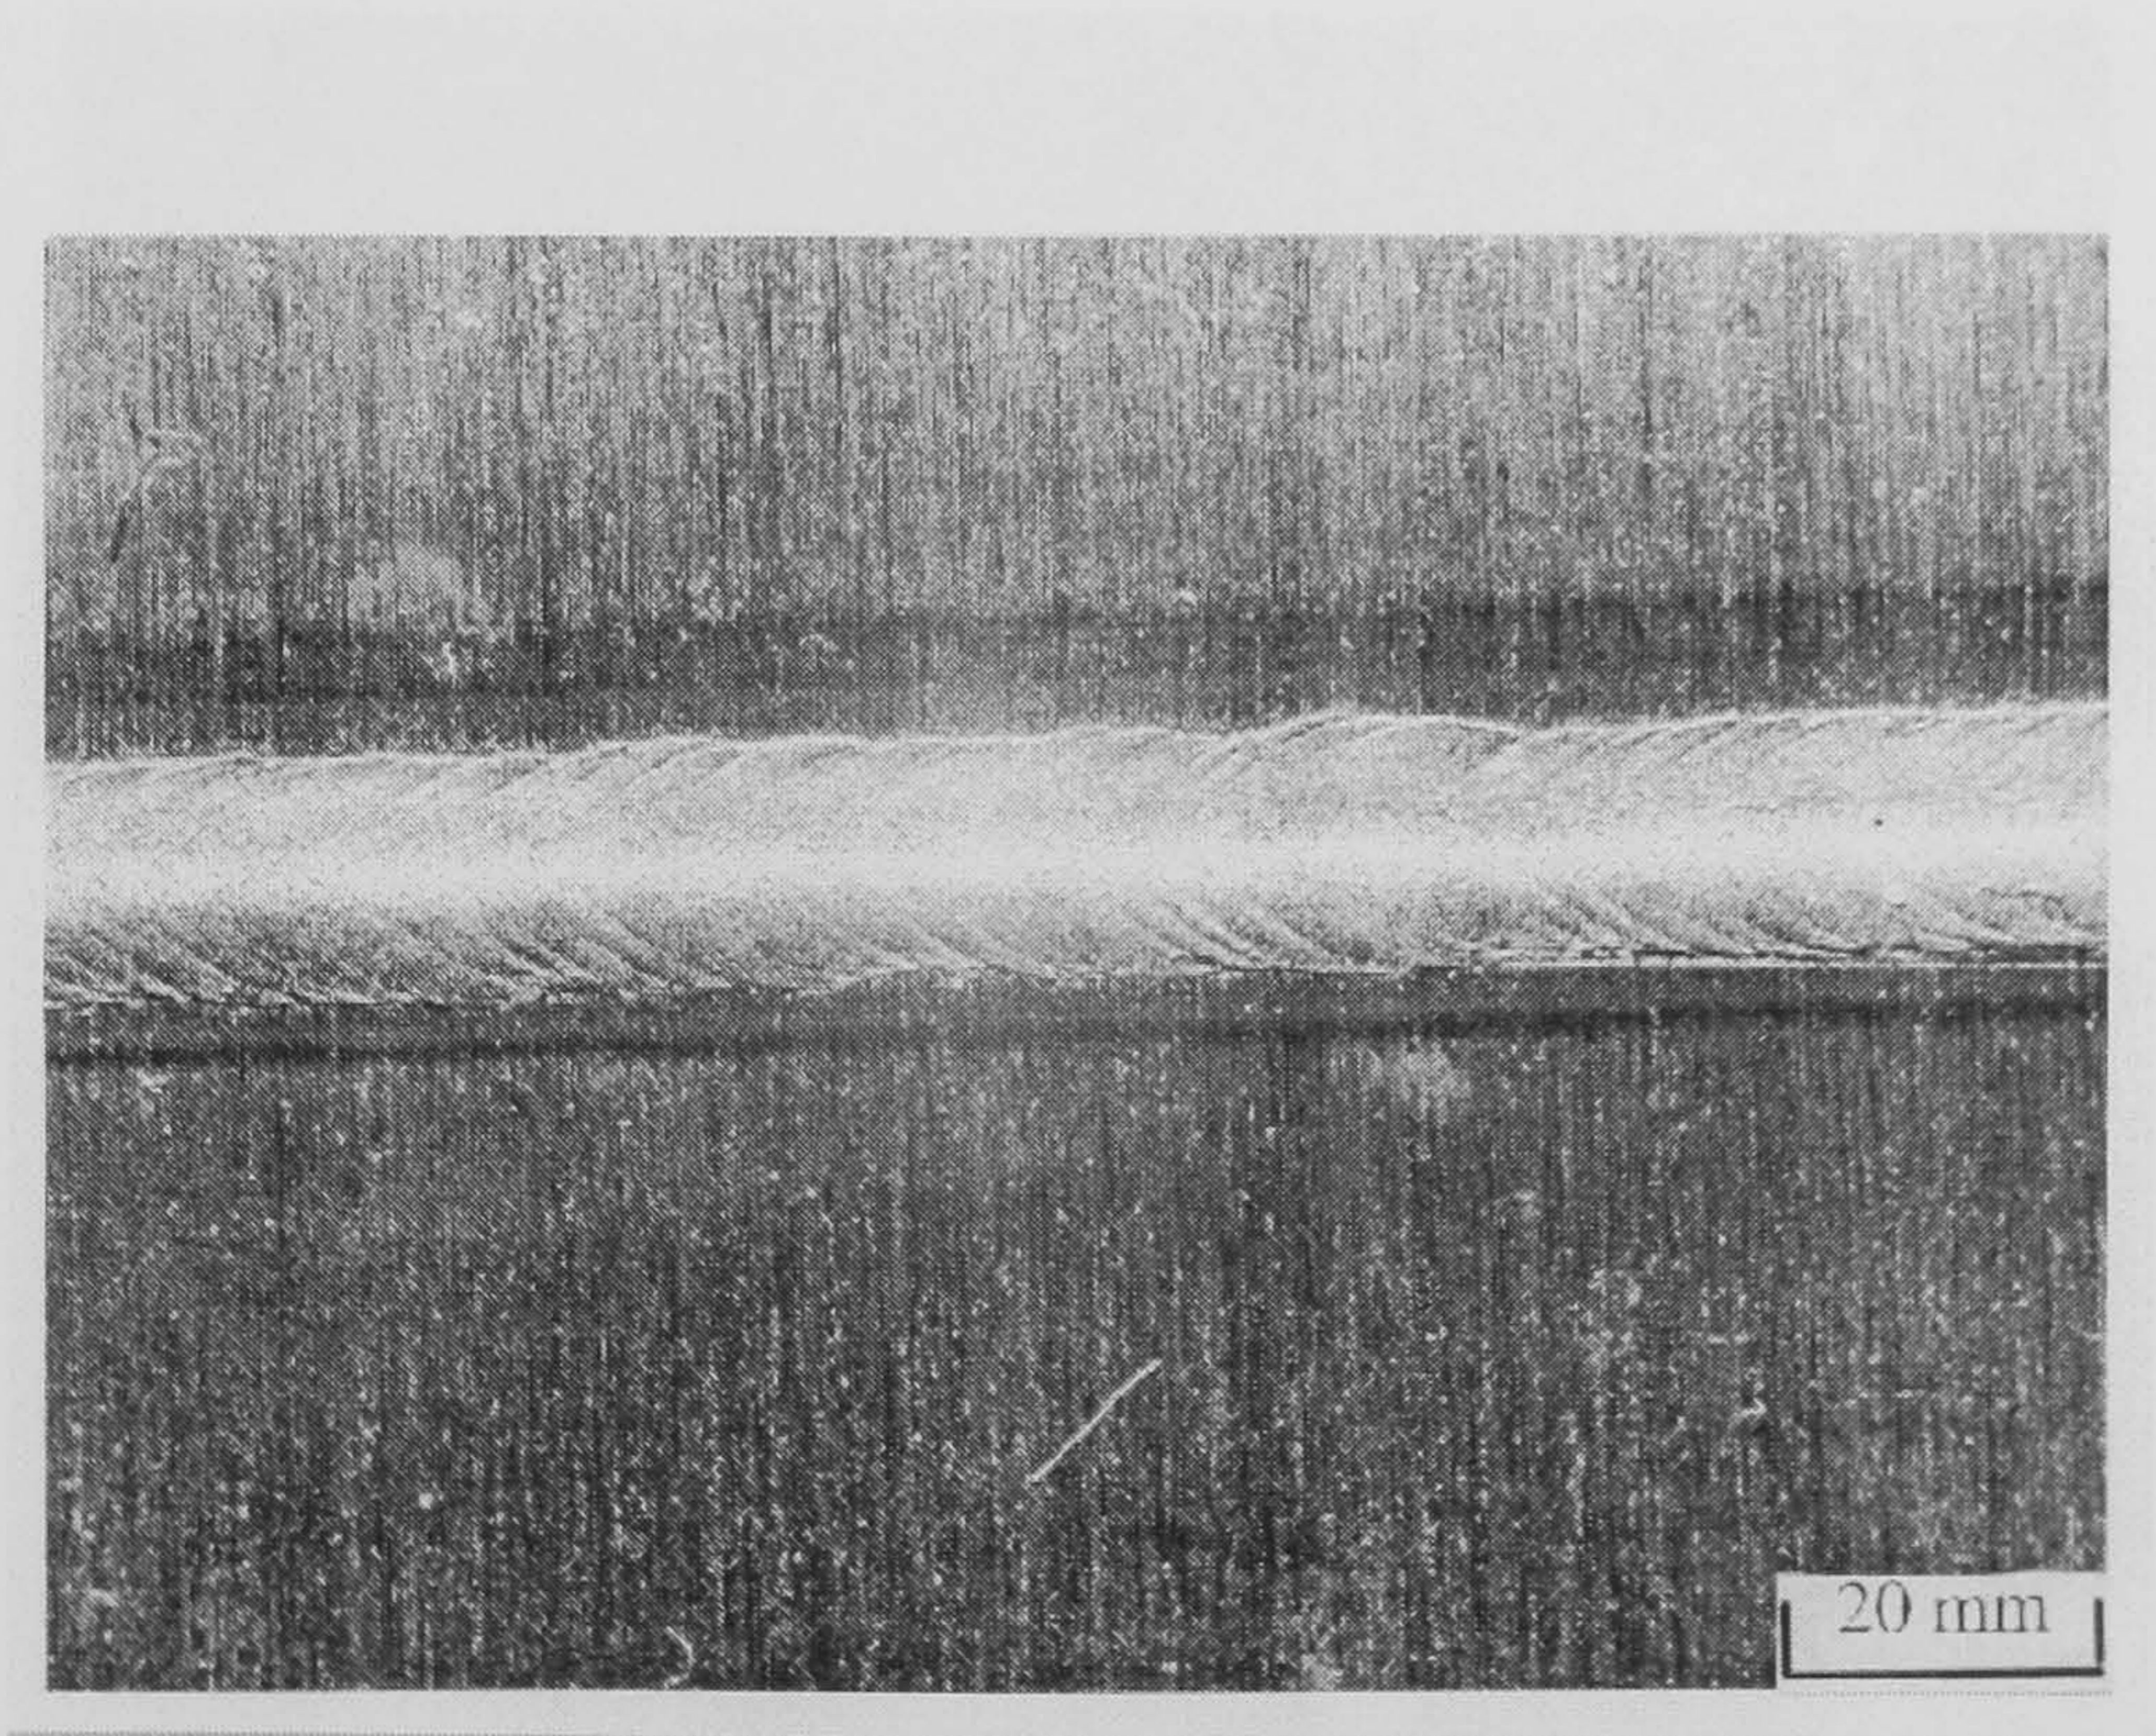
Weld seam appearance for diode laser weld at a welding velocity of 7 mm/s
